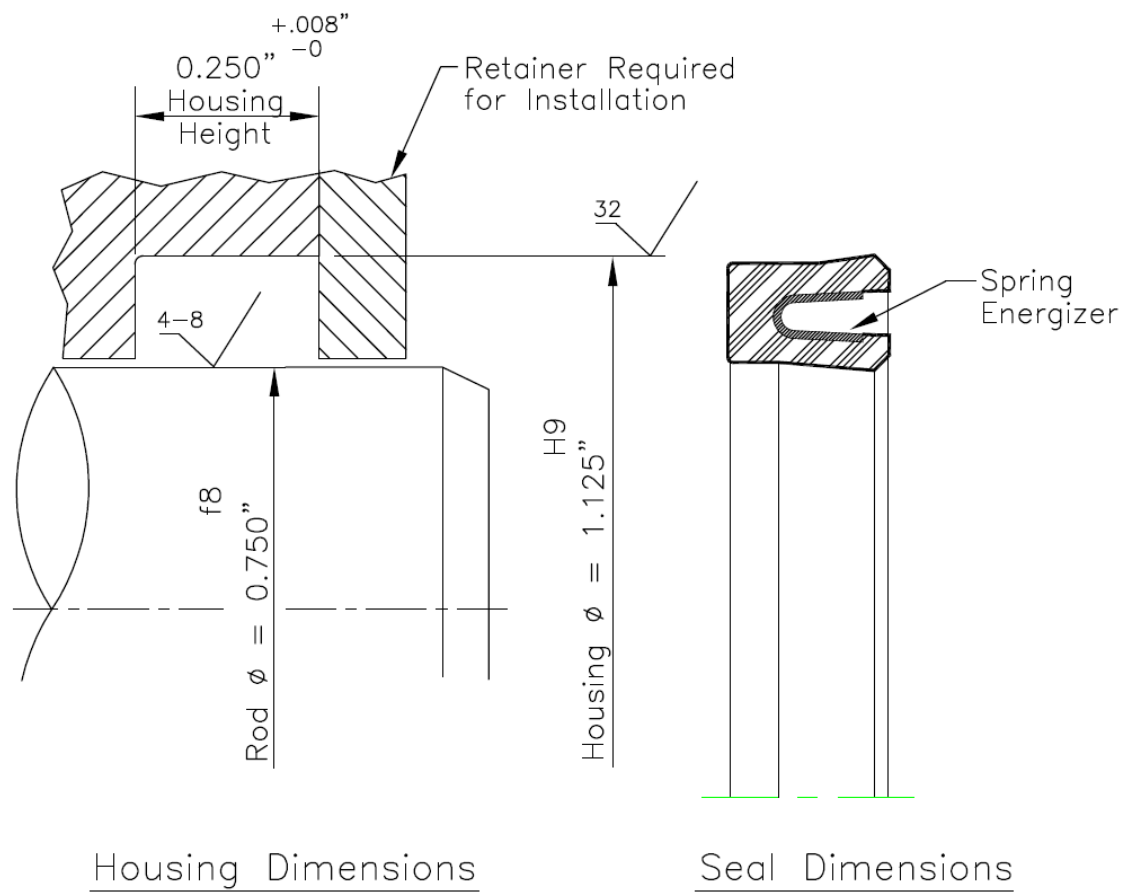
Manufacturer drawing of the seal and required housing specification (106).
